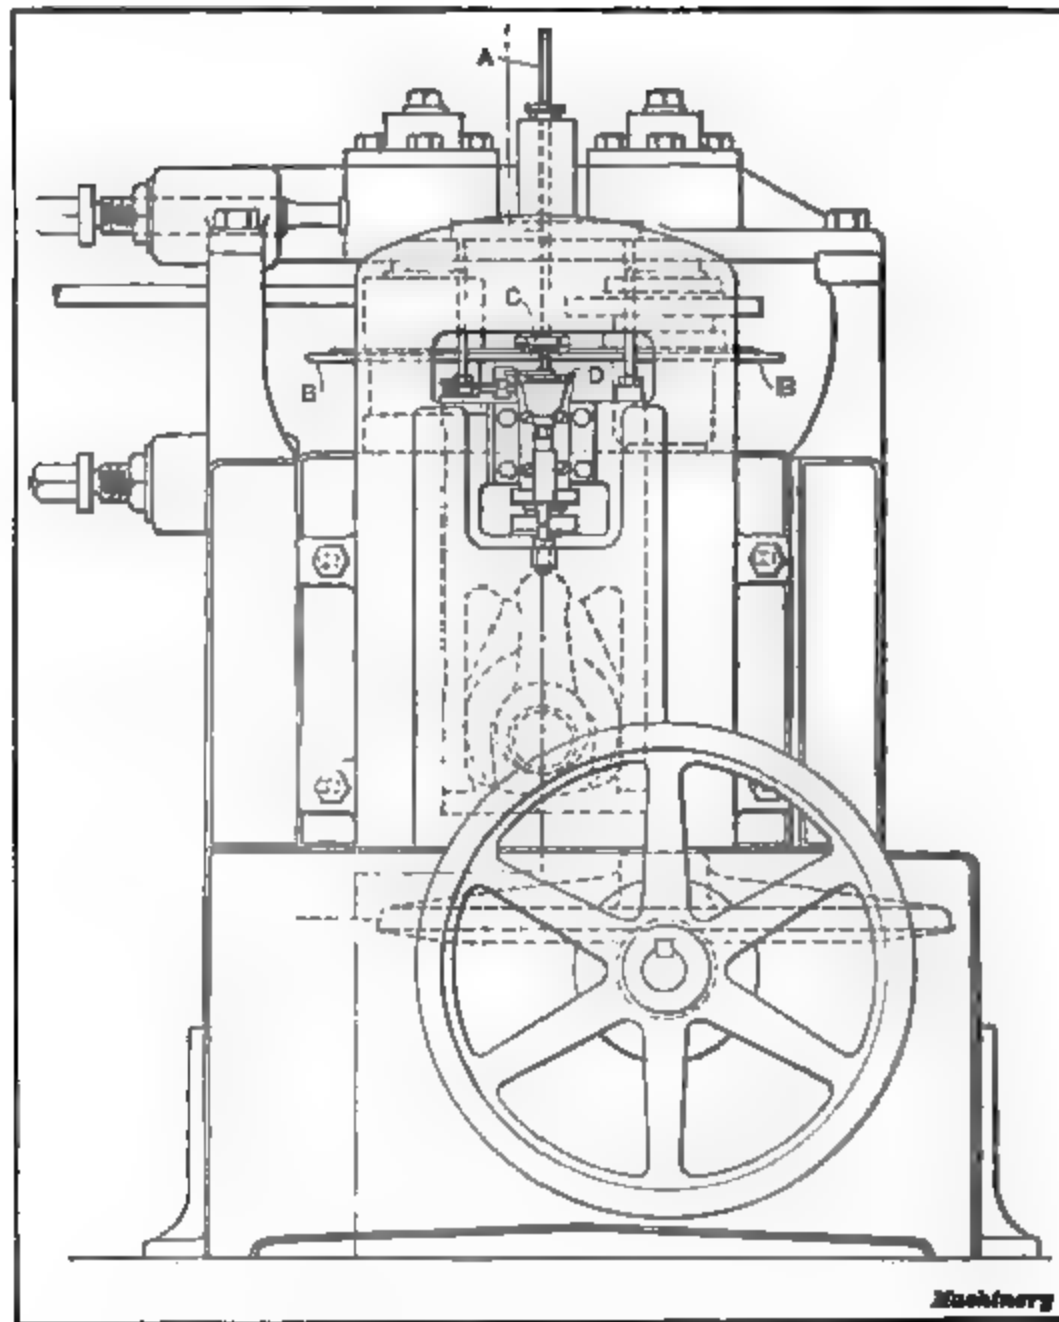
The Reid Machine for Making Slugs with Tapered Ends and Pressing Balls—U. S. Patent No. 801,367
